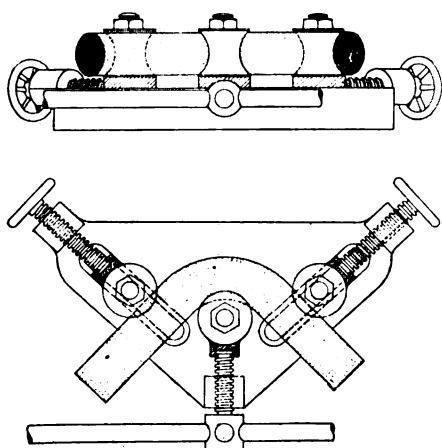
Diagram of bending apparatus for pipes too large to bend by hand
